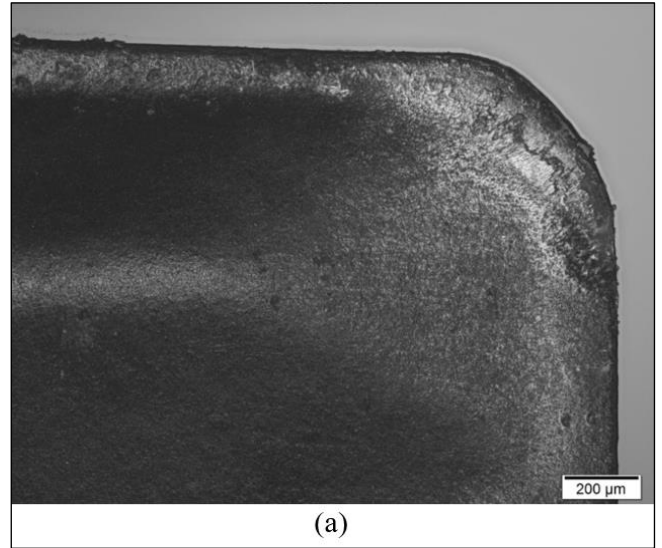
Wear on the cutting tool rake face with insert 0,4 mm: (a) Without sealant.
